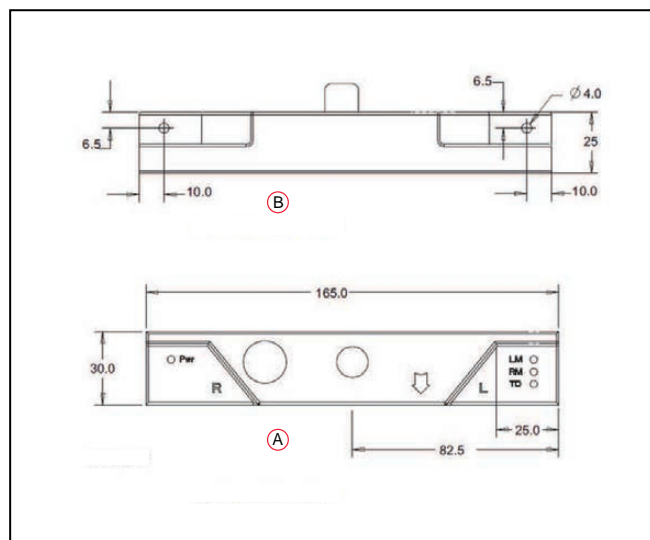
Overall Dimensions of the Sensor, (A) Top View and Dimensions, and (B) Front View and Dimensions (units are mm)
